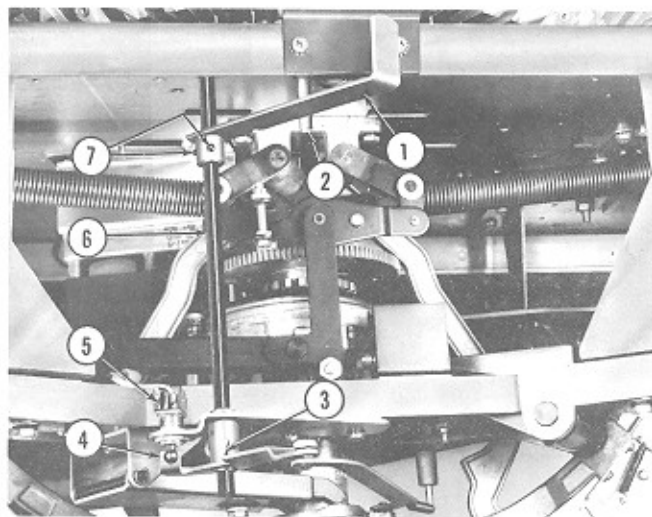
RECORD LOADING LEVER ADJUSTMENT
